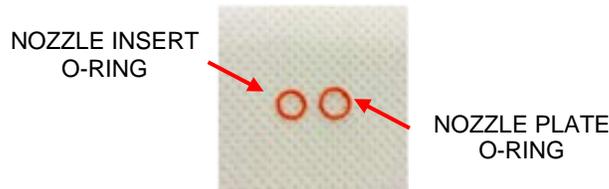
Nozzle Insert O-Ring (left) Compared to Nozzle Plate O-ring (right)
